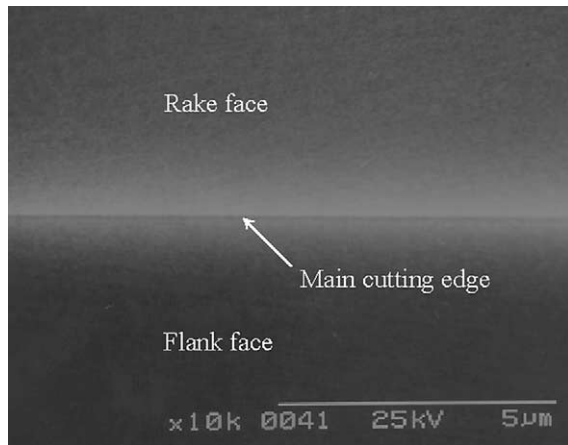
SEM photograph of the main cutting edge of an unused single-crystal diamond tool.
